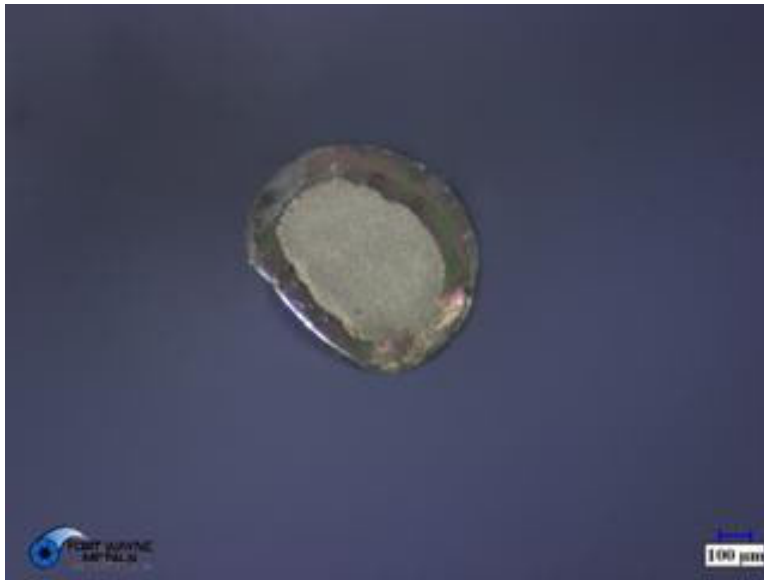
35N LT® DFT®-41Ag Cut End AFTER Corrosion Test
